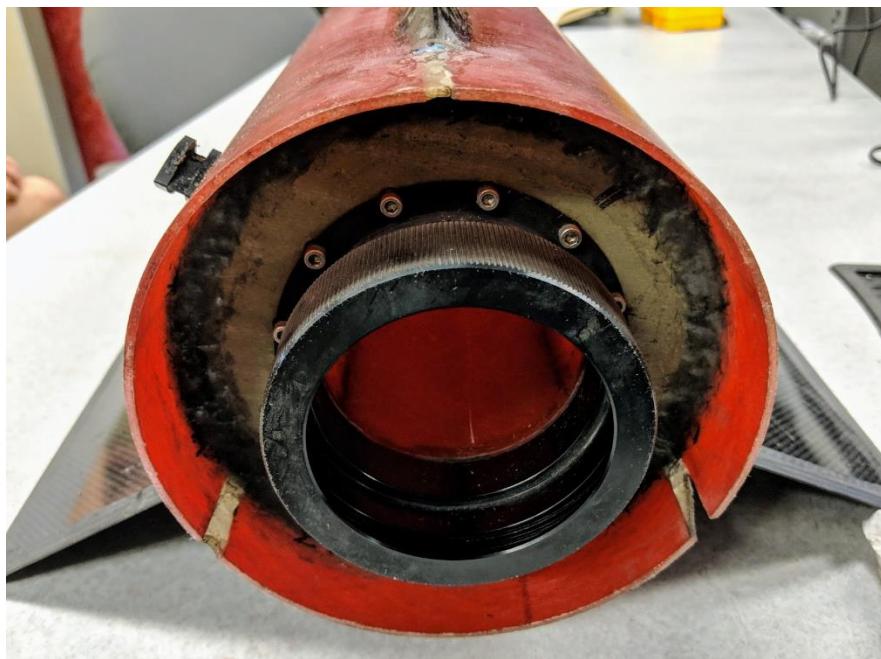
As-built lower end of rocket, with motor retainer and lower centering ring visible.
